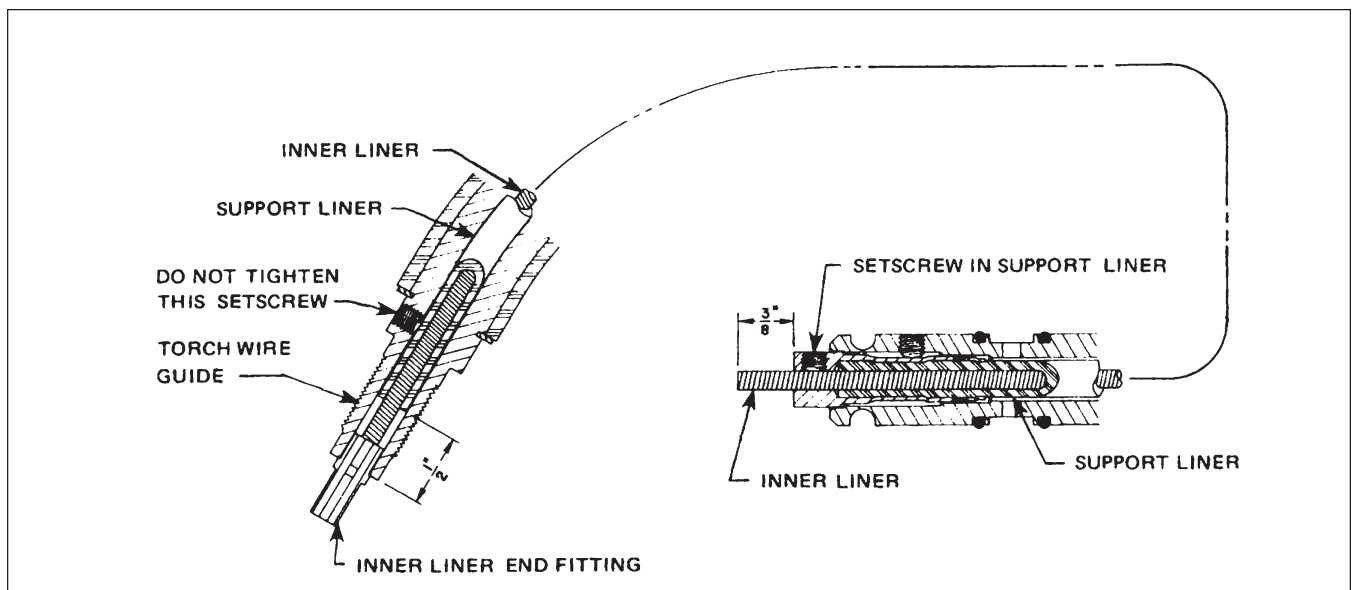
Installing 0.023-in. Inner and Support Liners
